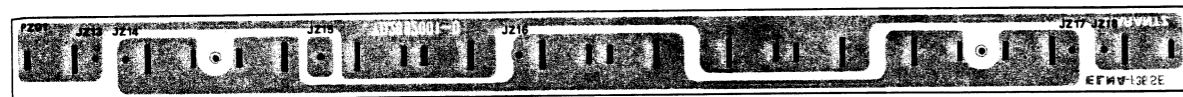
Dial Lamps Assembly PZ01 Component Locations
